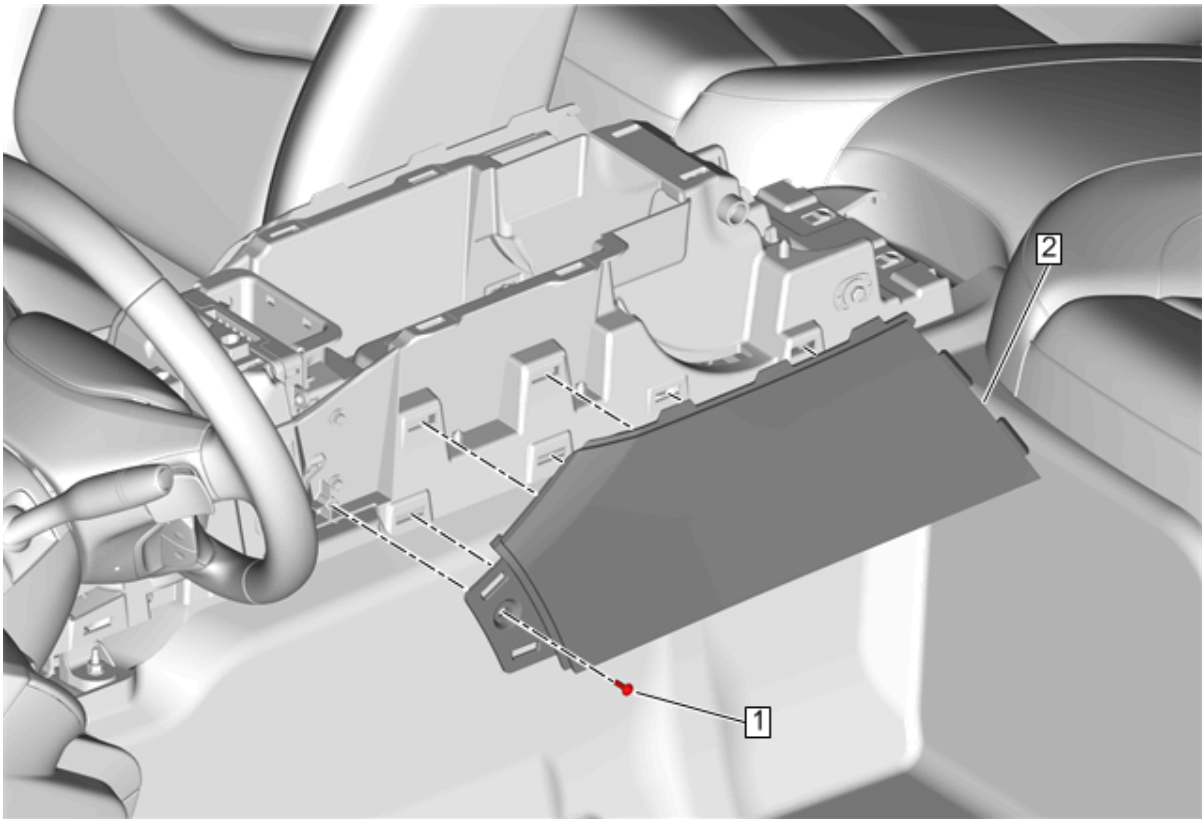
Front Floor Rear Console Side Trim Panel - Left Side
